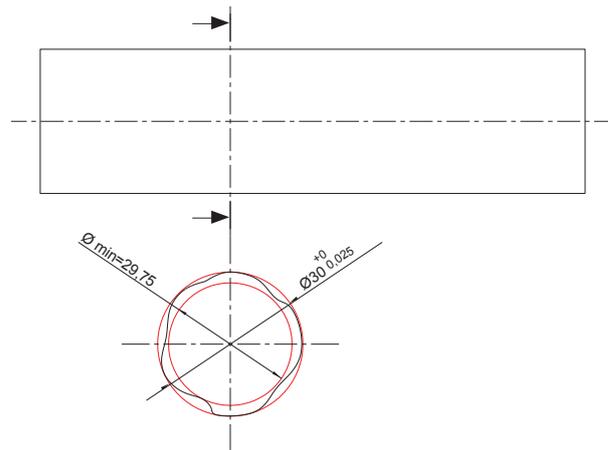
Geometric specification of a shaft using only dimensional tolerances.
